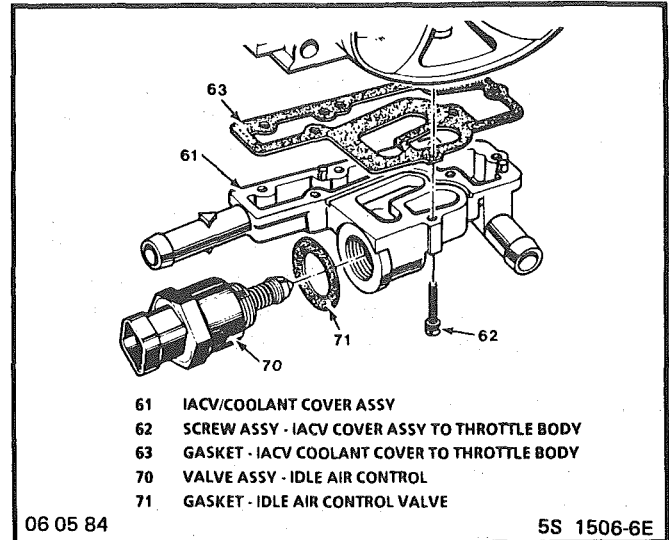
Idle Air Control/Coolant Cover Assembly
